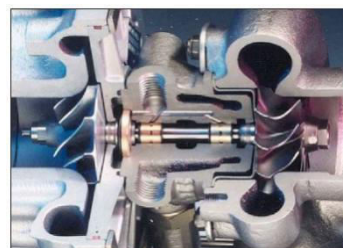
SECTIONAL VIEW OF TURBOCHARGER
